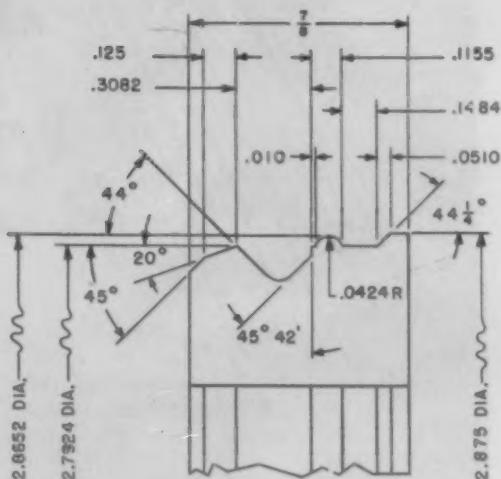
Sketch of the contour of form tool shown in Fig. 28a. (Courtesy: The Sheffield Corp.)
